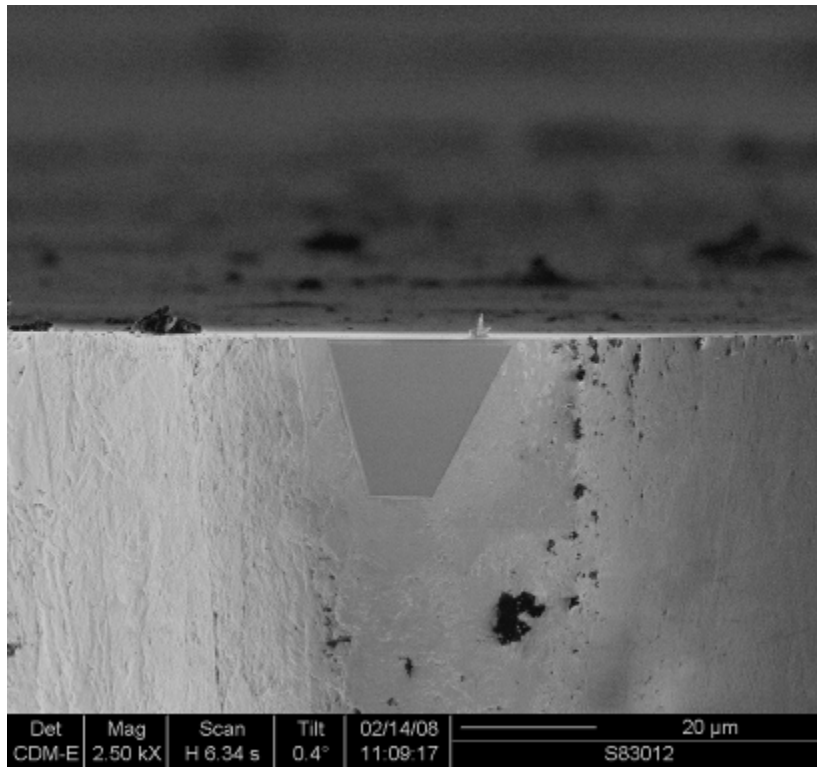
FIB image of the milled back tool front face below the cutting edge
